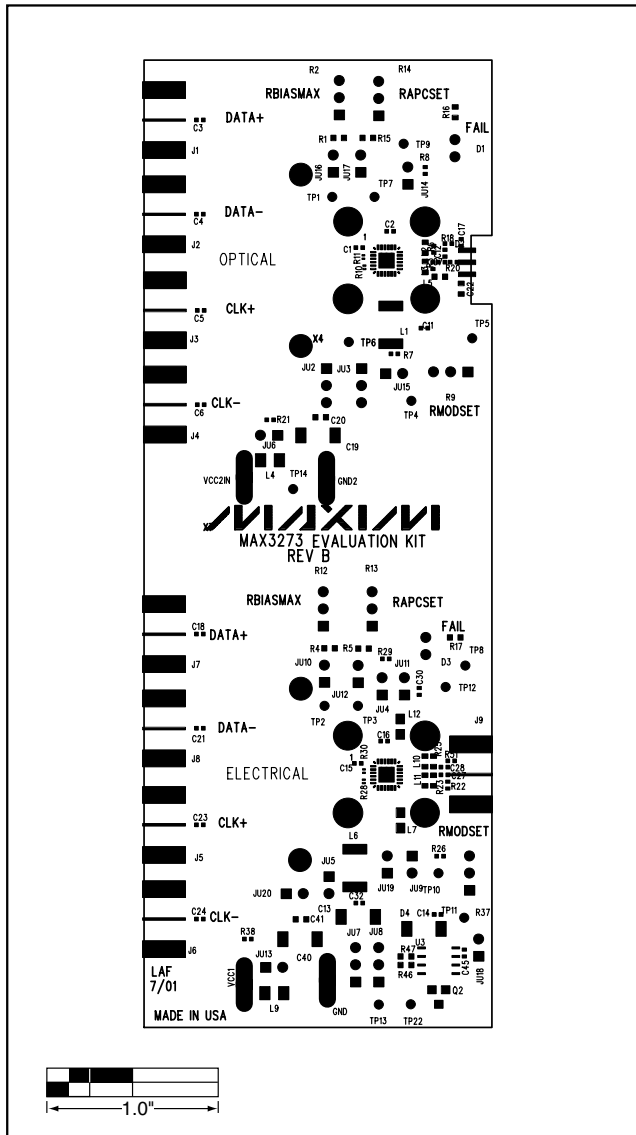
MAX3273 EV Kit Component Placement Guide—Component Side
